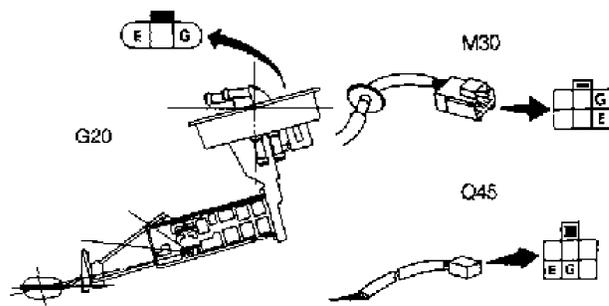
Identifying Fuel Tank Sending Unit Connector Terminals
